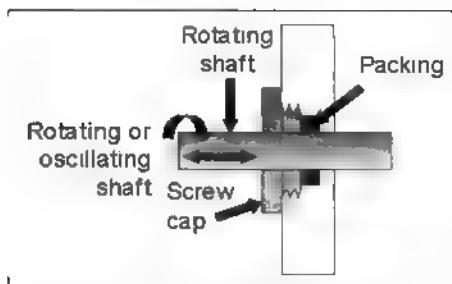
A stuffing box with packing compressed behind a screw-in cap.
